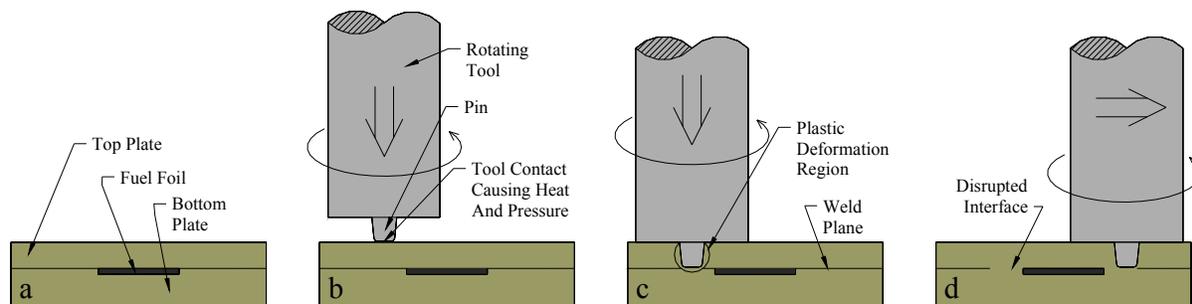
Friction Stir Welding Schematic. a) Shows the plate assembly for FSW of monolithic plates. In b) the rotating pin contacts the surface of the plate causing heat and pressure. In c) the tool has been plunged into the surface of the material up to the shoulder of the tool. The rotating tool is stirring the metal in the plastic deformation region. In d) the tool has been dragged across the weld plane causing a disrupted interface and bonding to occur between the plates and between the cladding and the foil.
